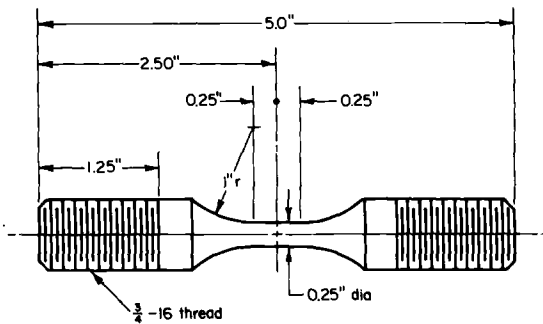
Longitudinal uniaxial fatigue test specimen.
